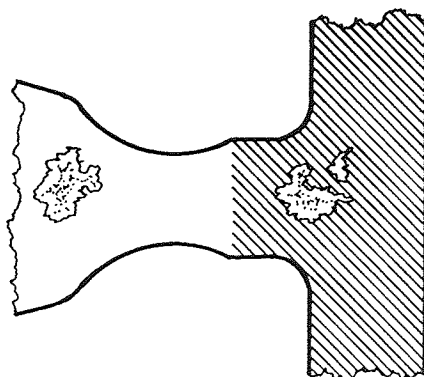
The effect of defective pattern assembly on the integrity of castings.
